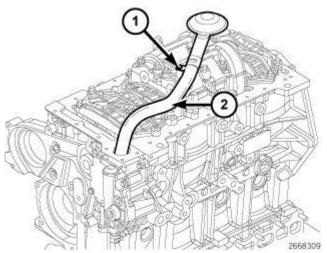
Oil Pump Pickup Tube & Bolt Courtesy of CHRYSLER LLC
